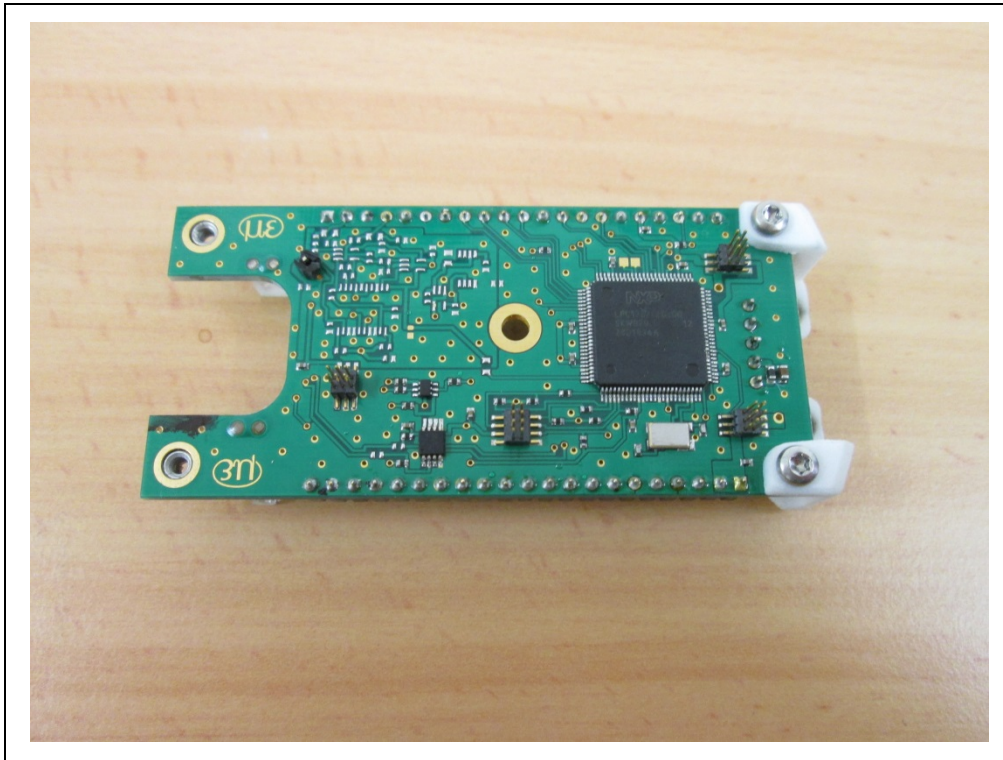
EUT#1, view of PCB 2 side 2
